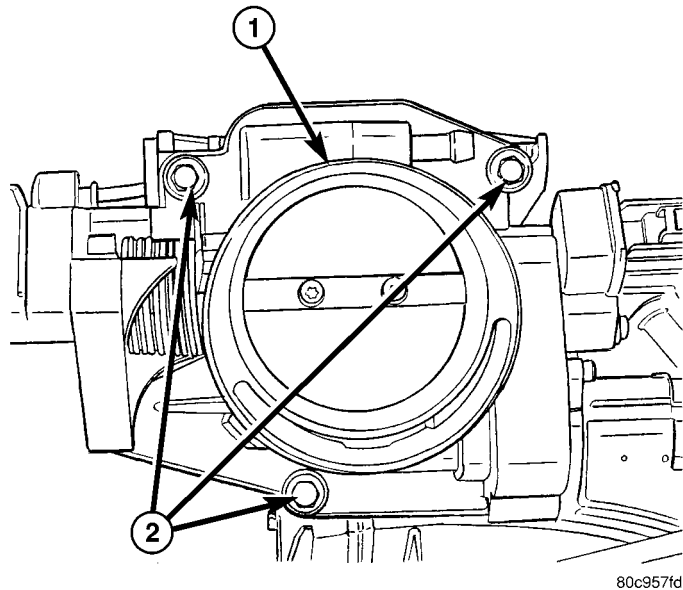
THROTTLE BODY MOUNTING BOLTS - 3.7L
